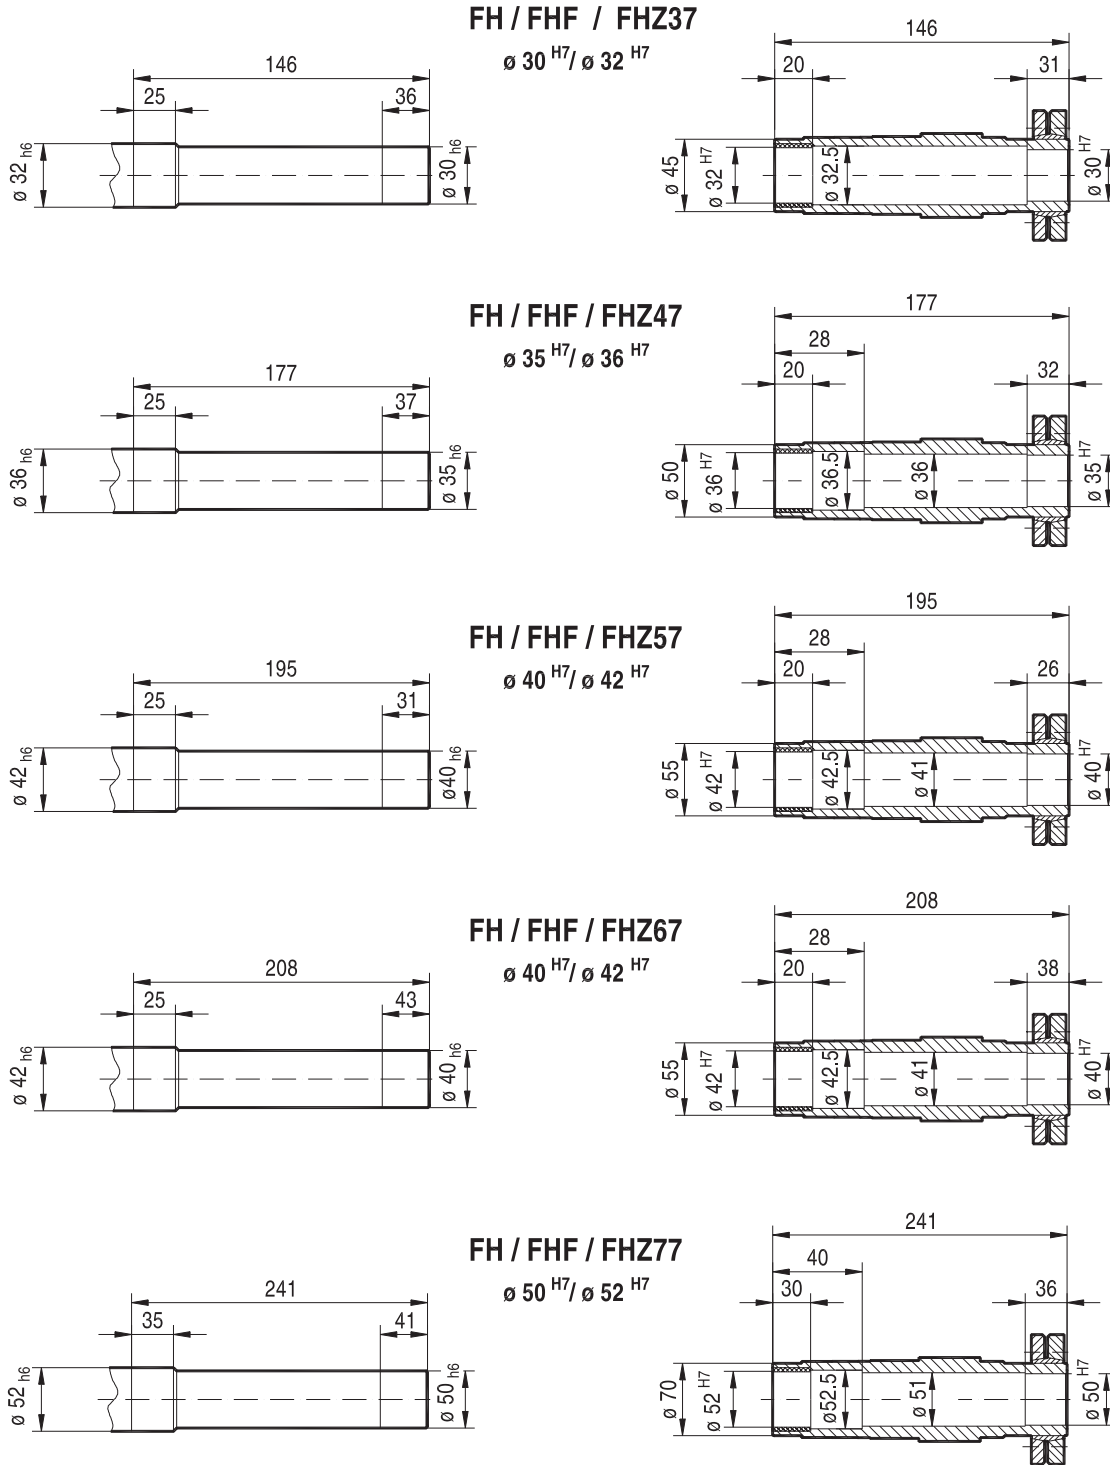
Shouldered hollow shaft FH/FHF/FHZ37...77
